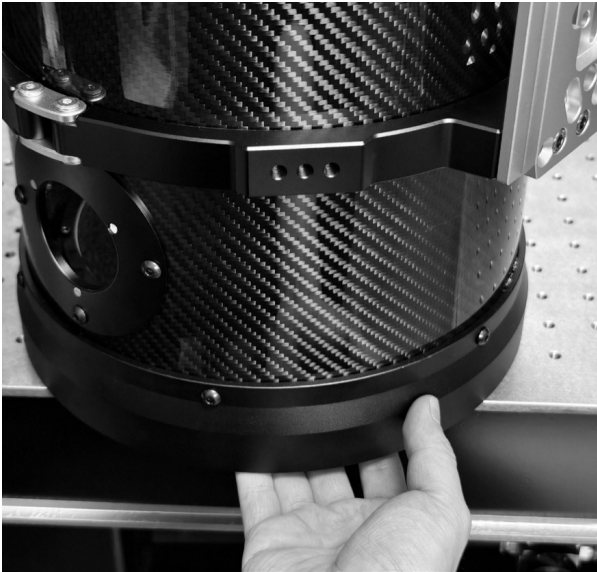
Hold the mirror mount with your hand and turn the entire telescope 180 degrees so that the tube is upside down.
